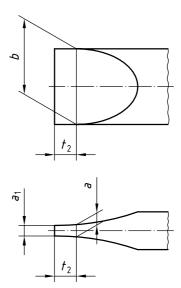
Form B for hand-operated screwdrivers and form C for machine-operated screwdrivers
